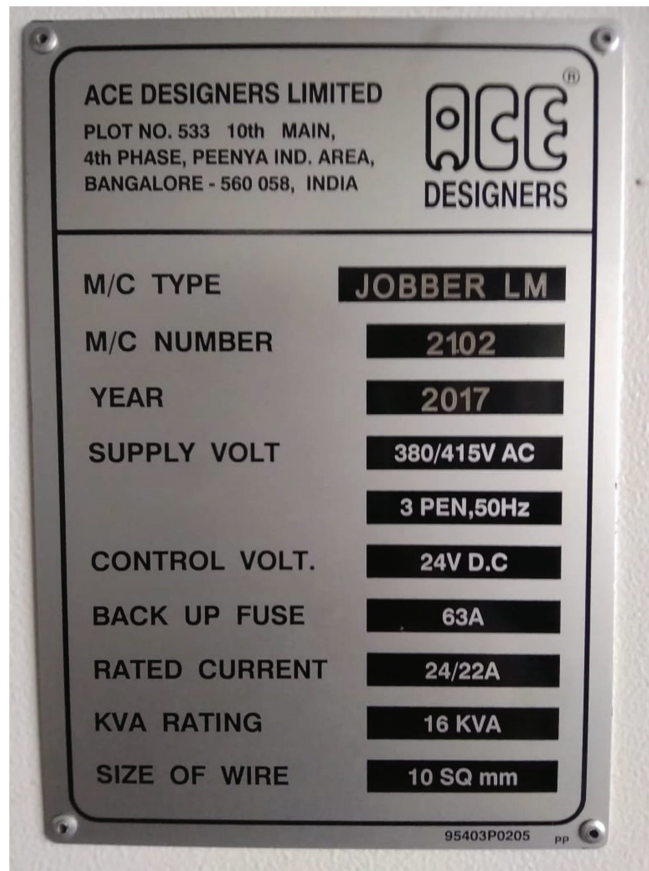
Specifications of CNC Turning Machine at RRIMT, Lucknow
